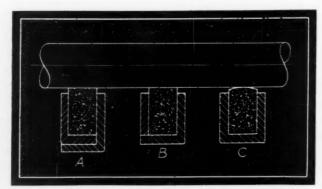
Schematic diagram of three types of metal retainers for felt packing, bearing edges of A and B being straight, that of C slightly convex
